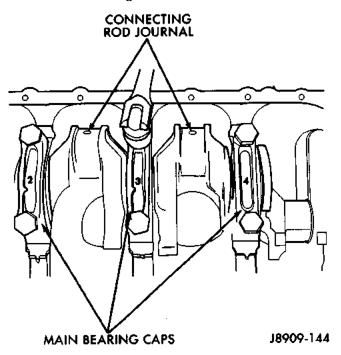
Removing Main Bearing Caps and Lower Inserts
